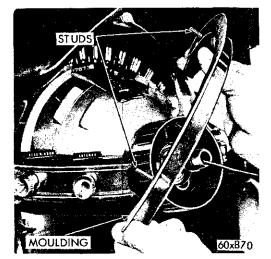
Removing and Installing the Instrument Cluster Dome Moulding
